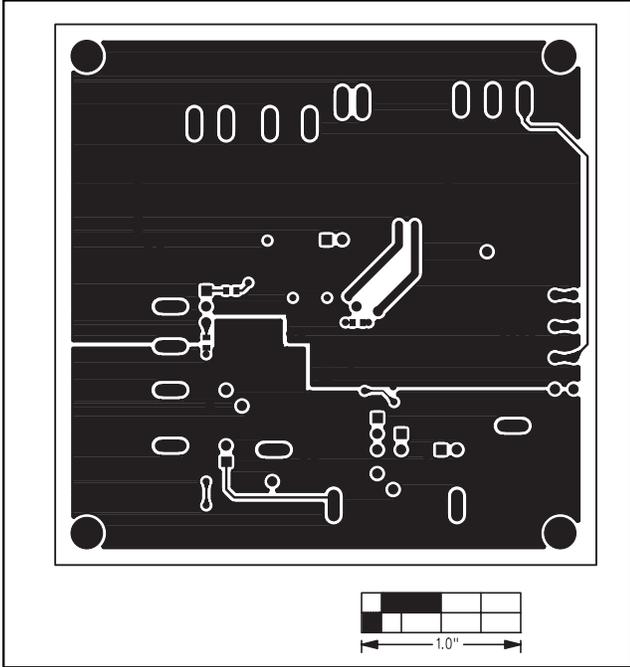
MAX1908 EV Kit PC Board Layout—Solder Side
